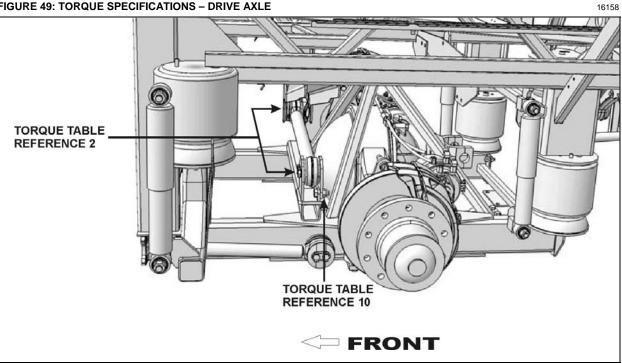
TORQUE SPECIFICATIONS - DRIVE AXLE
